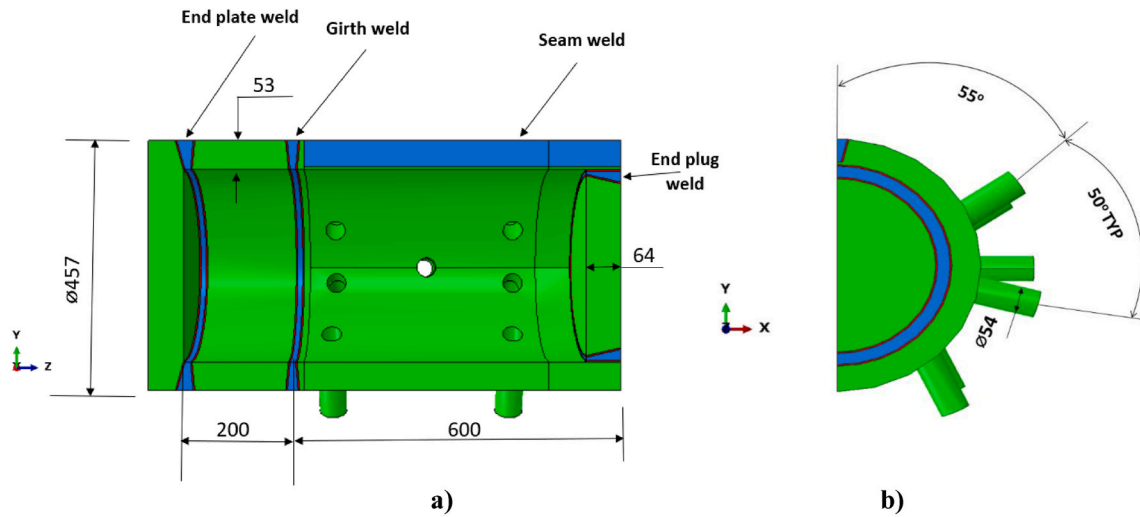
Layout and dimensions of Vessel-2 on a) elevation view and b) side view (All dimensions in mm).
